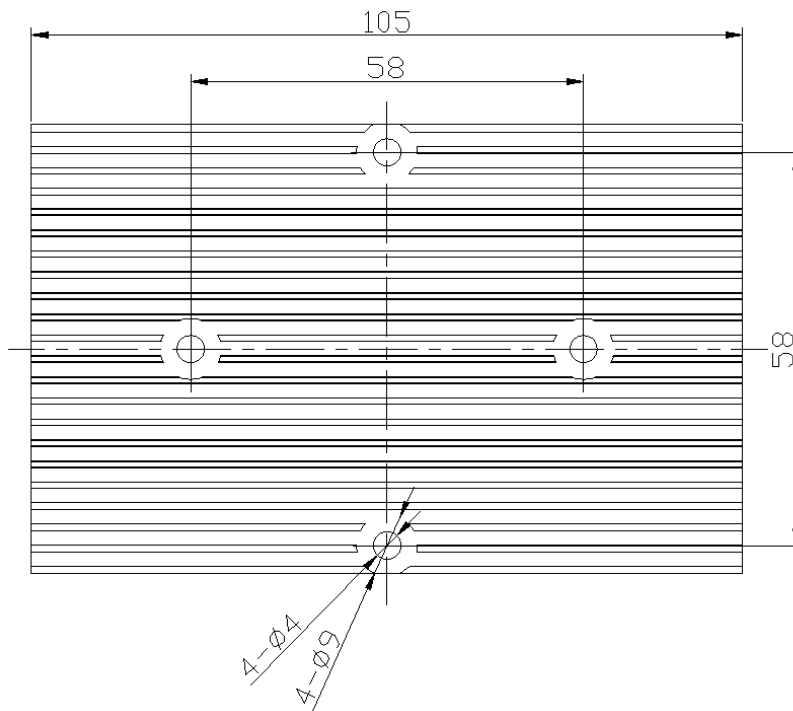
Mechanical Dimensions of Heat Sink ATHS-1/2/105/66/30H4
